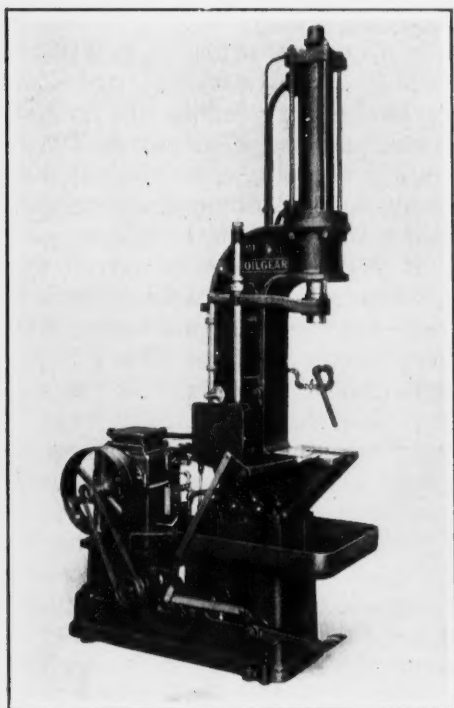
Broaching and Assembling Press of Cast Construction on which There are Many Exposed Parts, Including Pulleys, Belts, Levers, Rods, and Piping
